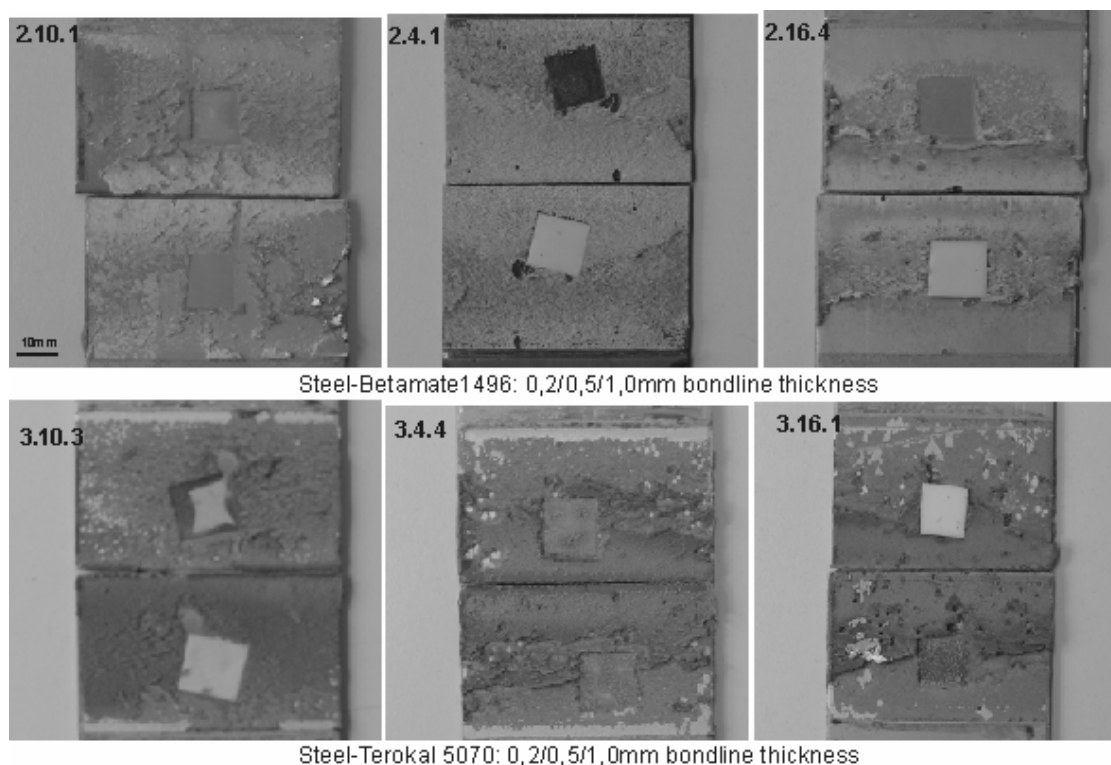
Macroscopic observations on the fracture surface of steel lap joints bonded with the adhesives "Betamate 1496" and "Terokal 5070" and inserted PTFE layer.
